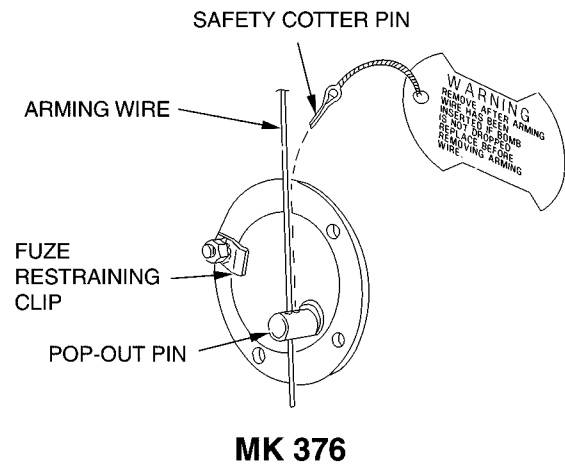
Mk 80/BLU Series Bomb Inspection (Sheet 1 of 3)
